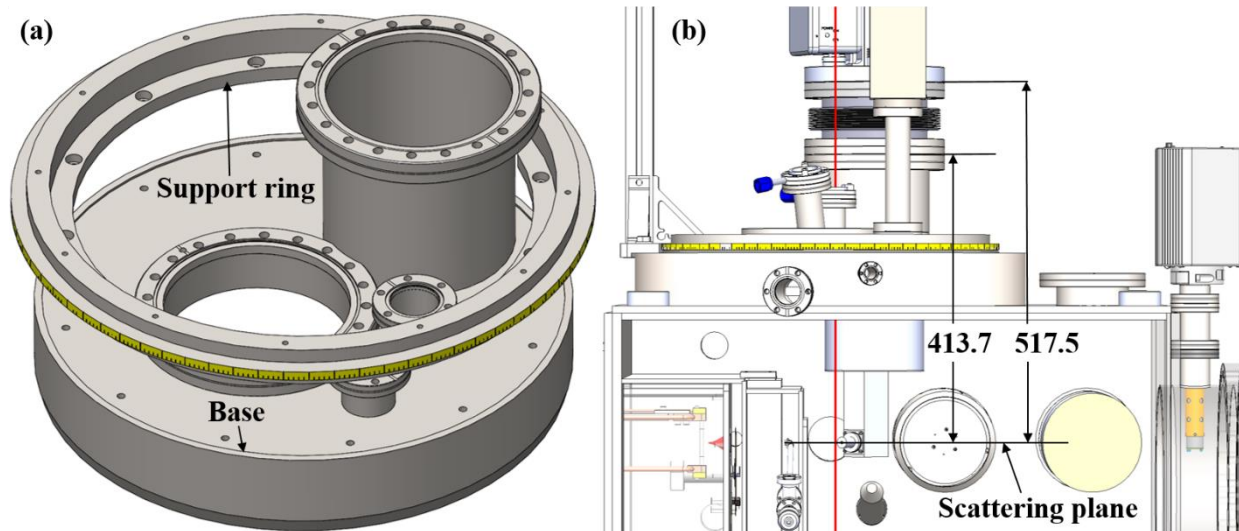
(a) Structure of the rotating platform which consists of a support ring and a base. The two pieces are bolted together by 11 M8 screws. (b) Section view of the chamber. The labels indicate the distance (in mm) from the CF160 flange to the scattering plane and from the CF160 flange of the bolometer to the bolometer detector.
